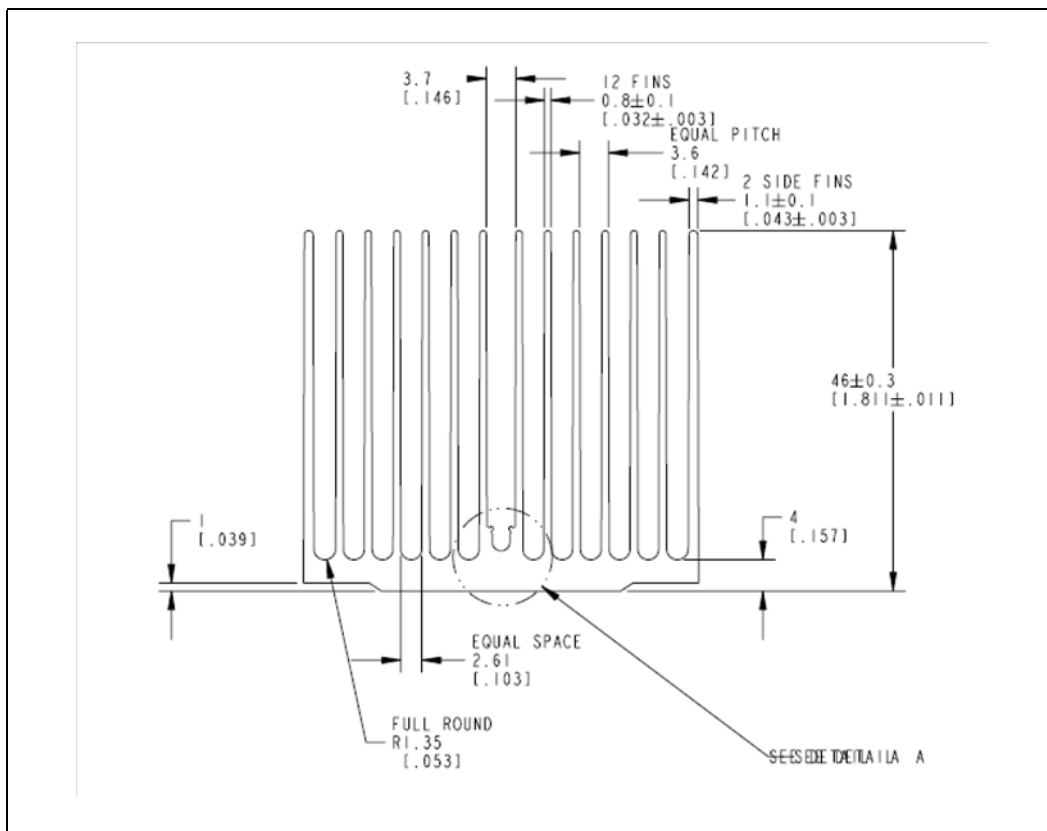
Intel 7300 MCH Heatsink Assembly
